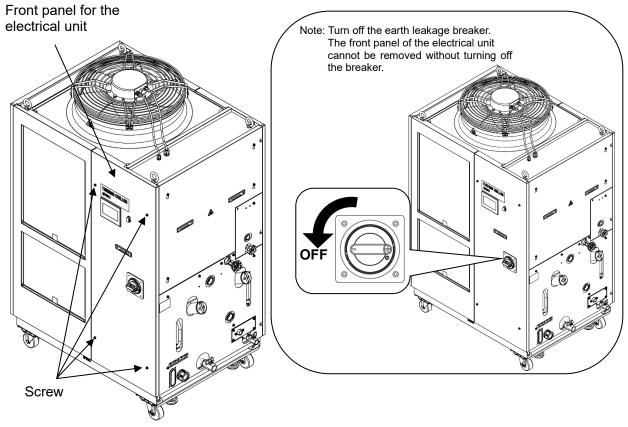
Remove the front panel for the electrical unit (For air-cooled type)
